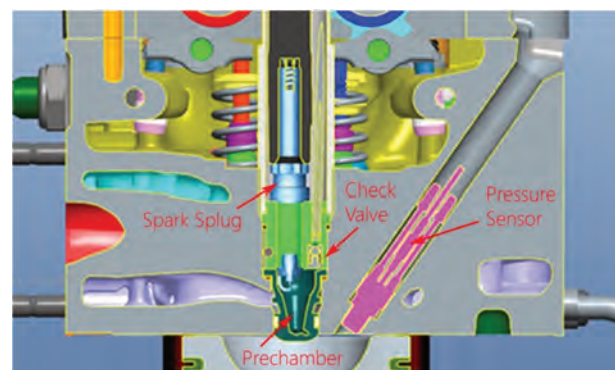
CAD visualisation of the combustion chamber of the prechamber engine
